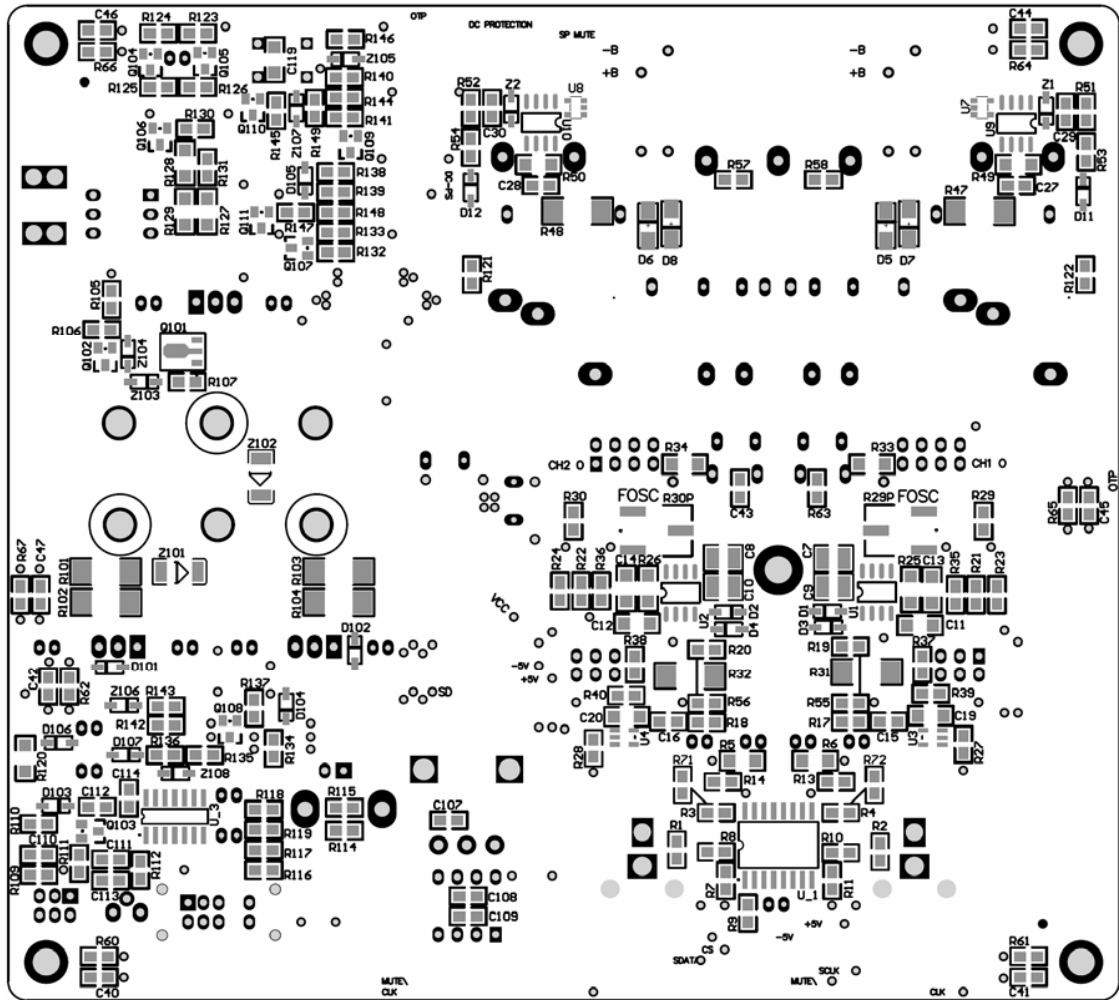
Bottom-Side Solder-Mask and Silkscreen
